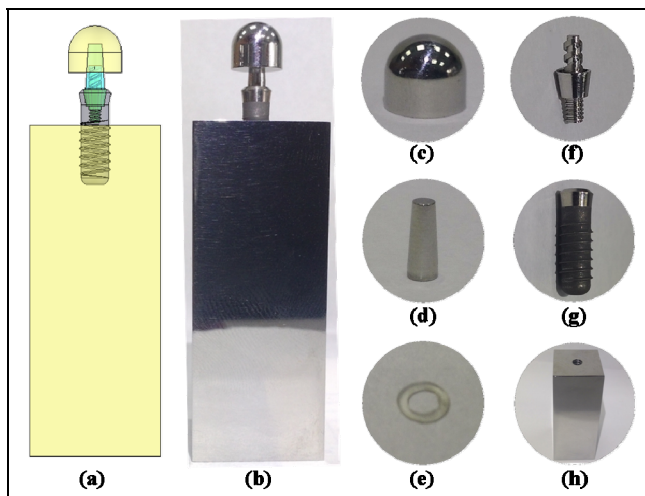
Three-dimensional model (a) and prototypes (b) of the novel dental implant system. (c) hemispherical head. (d) coping. (e) resilient ring. (f) abutment. (g) fixture. (h) specimen holder.
